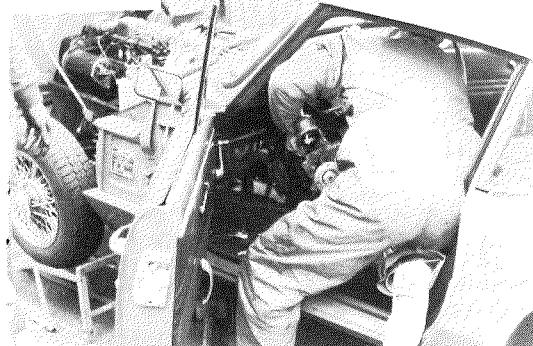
After a while of trying different angles of attack, the gearbox will eventually come out. Readers' pet 'box removal tips welcome.
